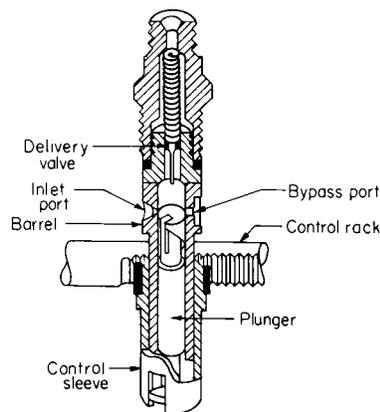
Bosch plunger, barrel, and delivery valve assembly.
